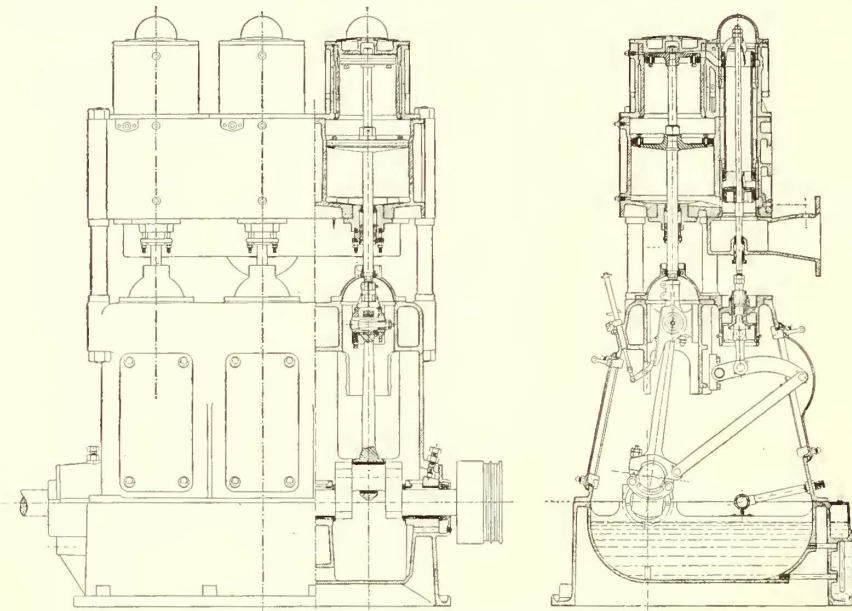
SECTIONS OF AUXILIARY ENGINES
